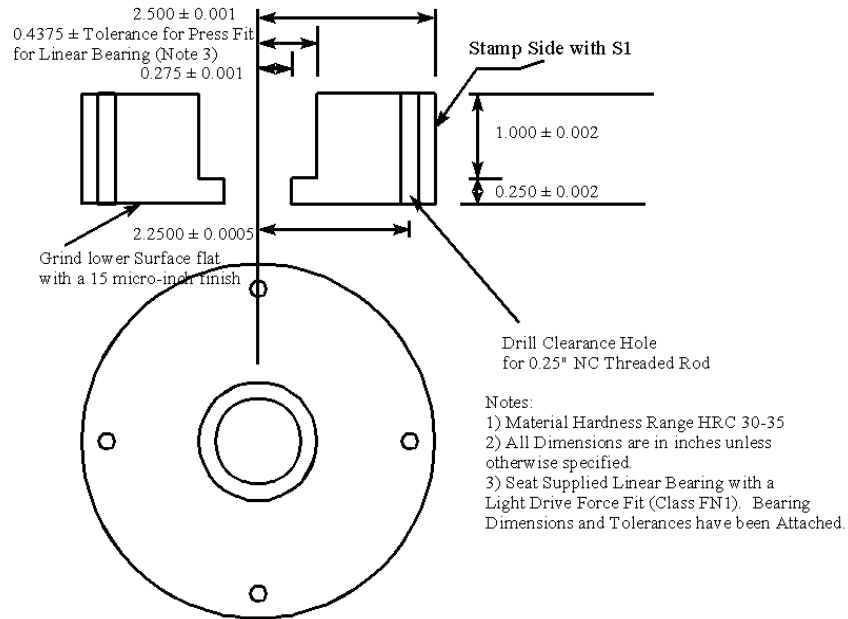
Schematic showing the general dimensional design requirements of the upper linear bearing platen fabricated for the shear punch test fixture.
